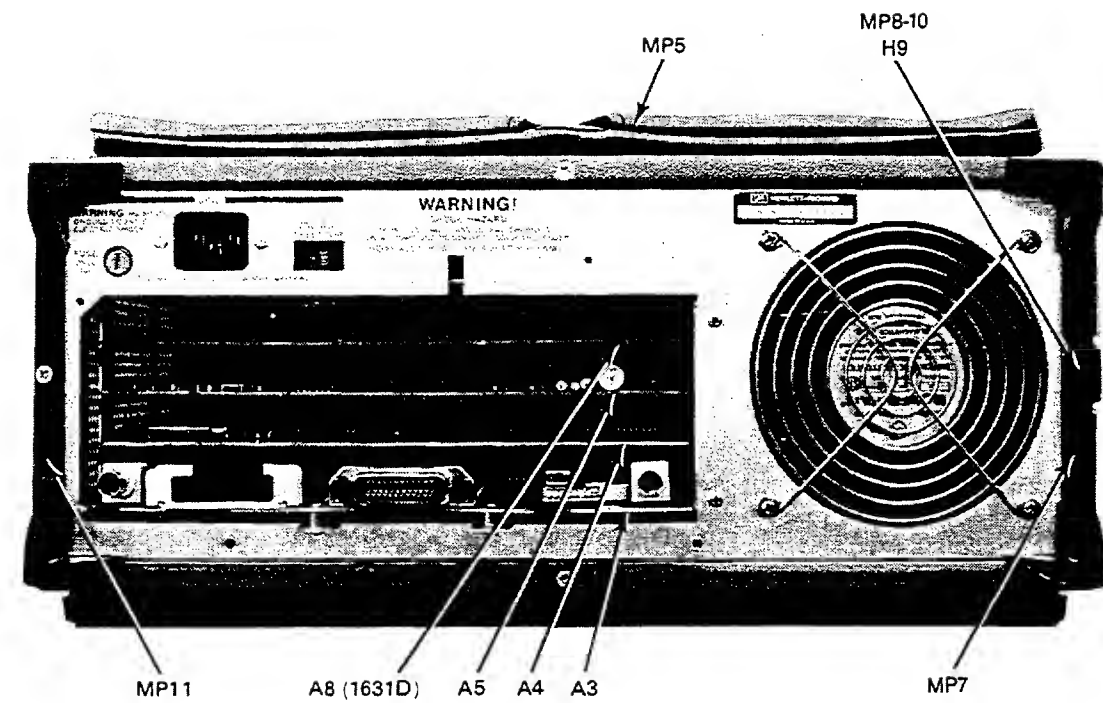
Mainframe Mechanical Parts Locations (sheet 2 of 4)
